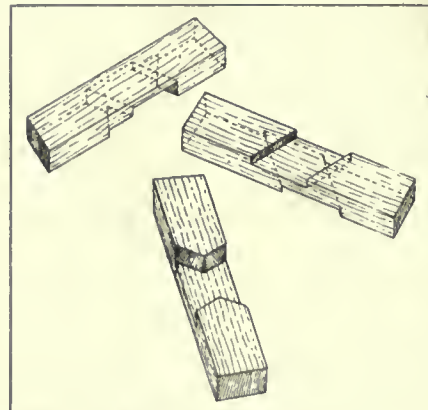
METHOD OF CROSSING THE PIECES TO FORM 6 ARMS.
